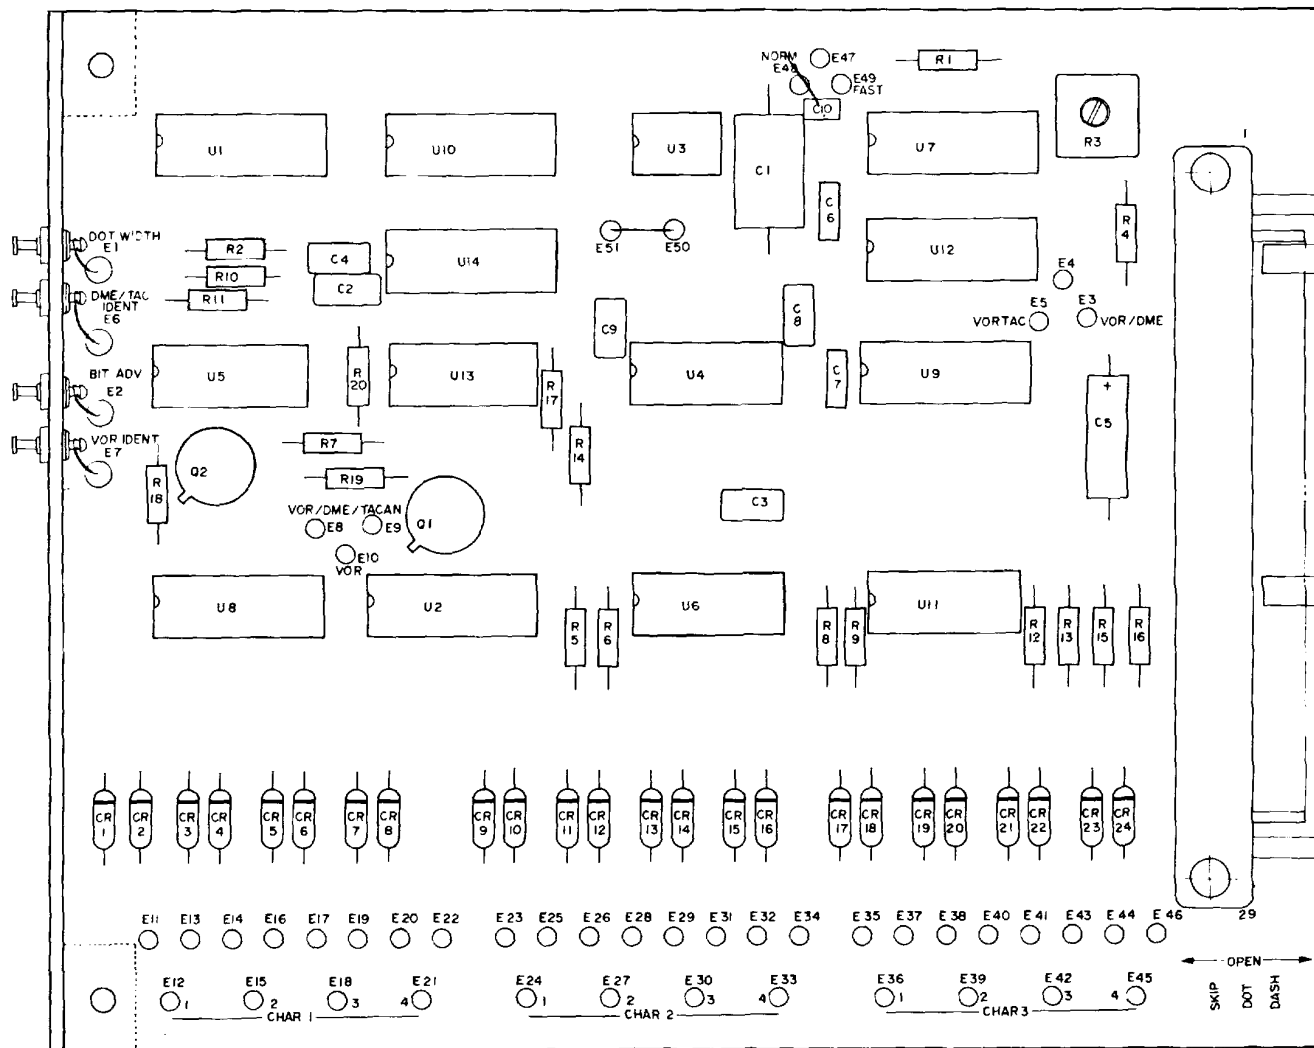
Ident Keyer Circuit Card Assembly, 1A4A1 Parts Location Diagram
